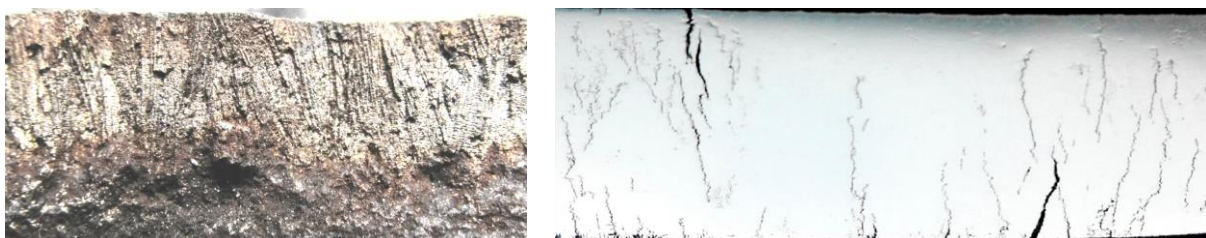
Fracture and cracking of metal of thick-walled cast coil pipes
